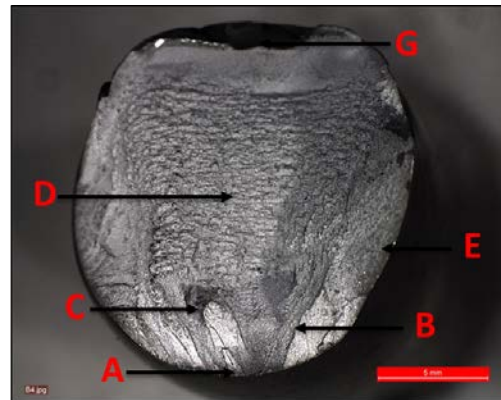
Fractograph of T6/Polished/Shot Peened Test Specimen 3
